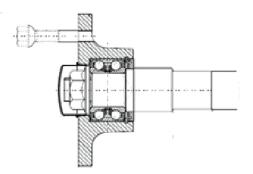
Cross-section of the KNOTT wheel hub with bearing
